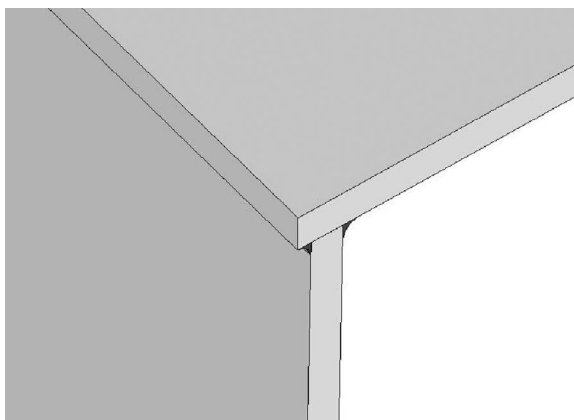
A welded joint in a fabricated rectangular horn.
